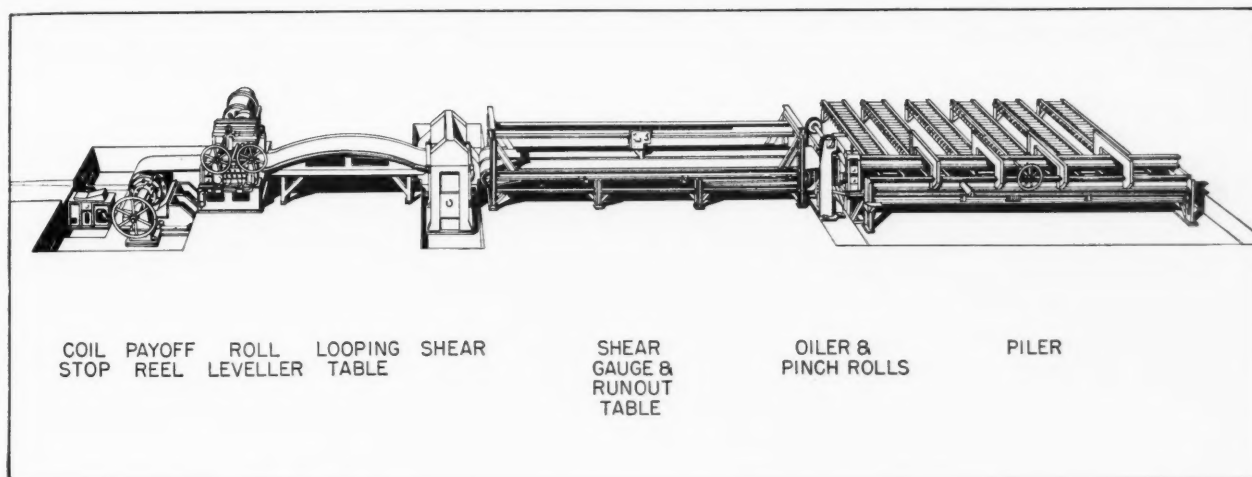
New Bliss shear line for flattening and cutting coil stock
